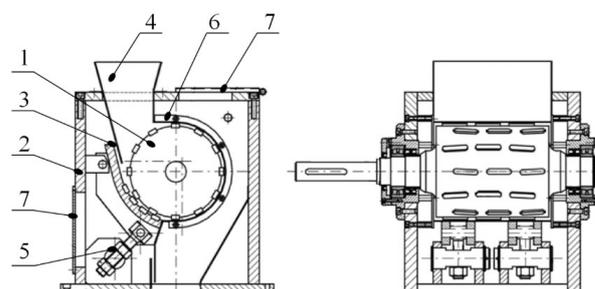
Design of a retting mill [19] (1-rotor, 2-cradle, 3-plate, 4-input neck, 5-adjustment screws, 6-drum sieve, 7-control cover).
